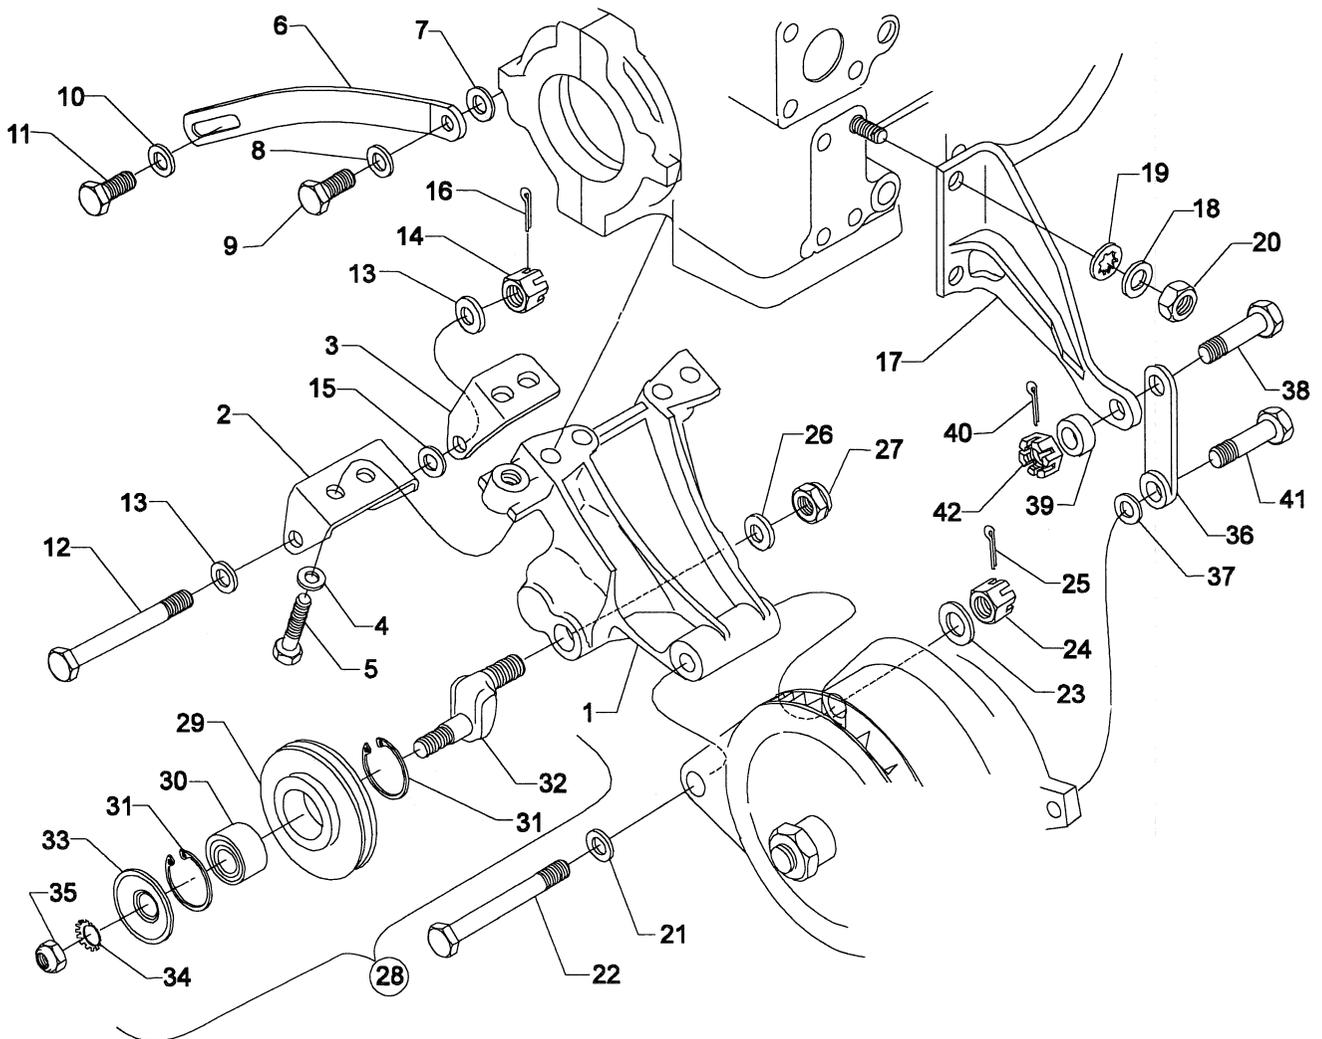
(DUAL) ALTERNATOR MOUNTING AND ATTACHING PARTS
